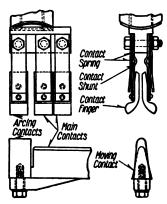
Details of the Type F-22 Contacts Used on the 600-Ampere, 7500-Volt Breaker
